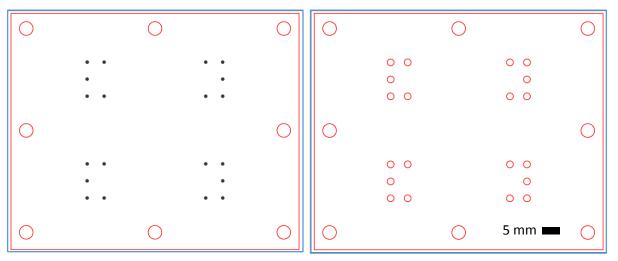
A: Design of PMMA chipholder bottom plate, with engraved spots for alignment of the fluidic connections. The holder is produced from cast PMMA of 6 mm thickness using the Trotec Speedy 300 laser cutter. Cutting is done at 500 dpi, 10,000 Hz, power 100, speed 0.3. Engraving of dots: 500 dpi, 10,000 Hz, power 100, speed 3.
